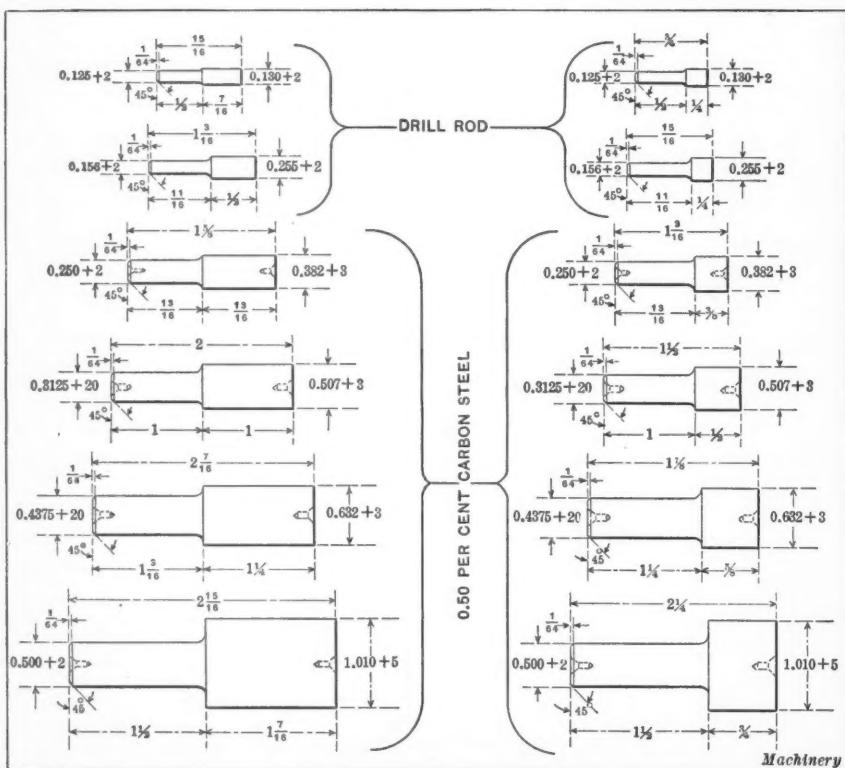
Standard Plug Gage Blanks for Limit Gages used by the Pratt & Whitney Co.
